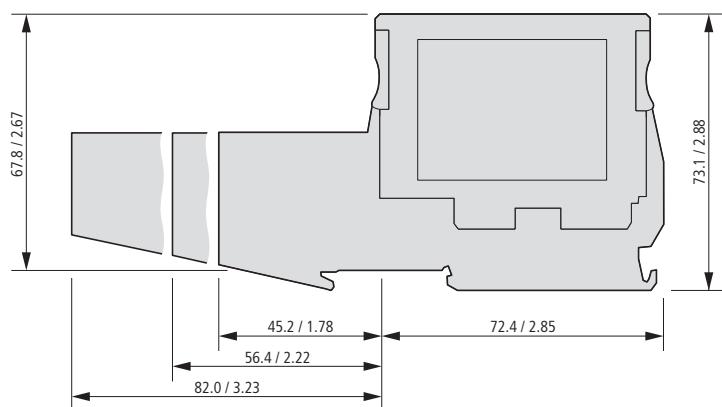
Side view complete BL20 module (with tension clamp connection)
